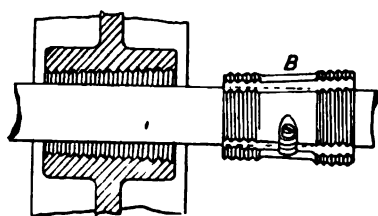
Screw Bush. (Smith & Grace Screw Boss Pulley Co., Ltd.)
